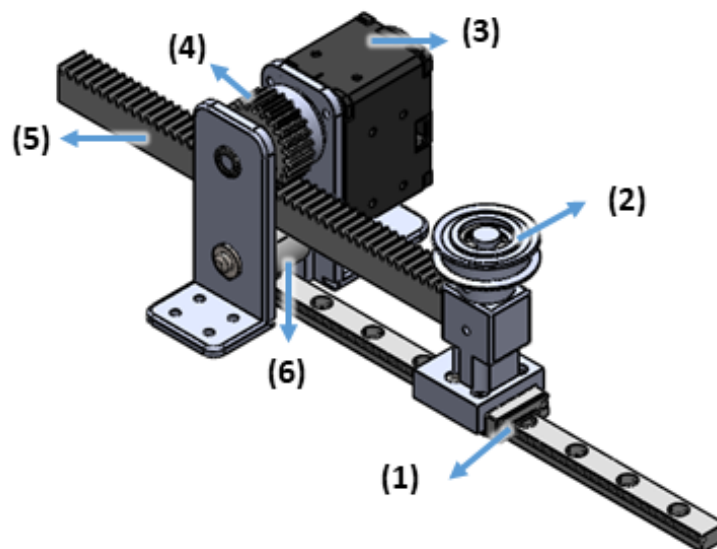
CAD of tensioning unit with the scale 1:2, (1) is linear slider, (2) is movable pulley, (3) is actuator which is servo motor, (4) is a pinion gear, (5) is a rack gear and (6) is supporting roller
